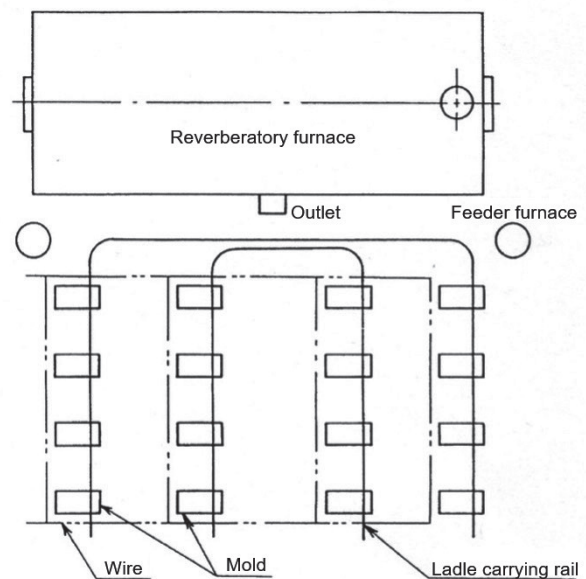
Arrangement of Reverberatory Furnace and Inclined Casting Machine^{1, 2}
